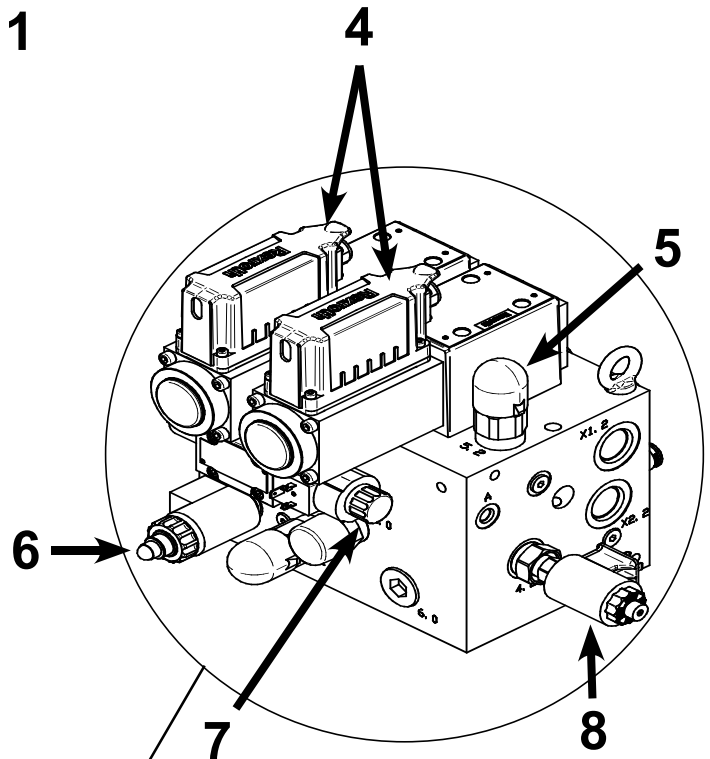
Hydraulic Control Manifold (located on top of the hydraulic oil reservoir)
